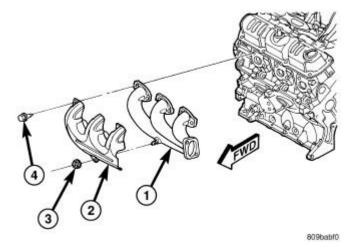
EXHAUST MANIFOLD - LEFT Courtesy of CHRYSLER LLC
